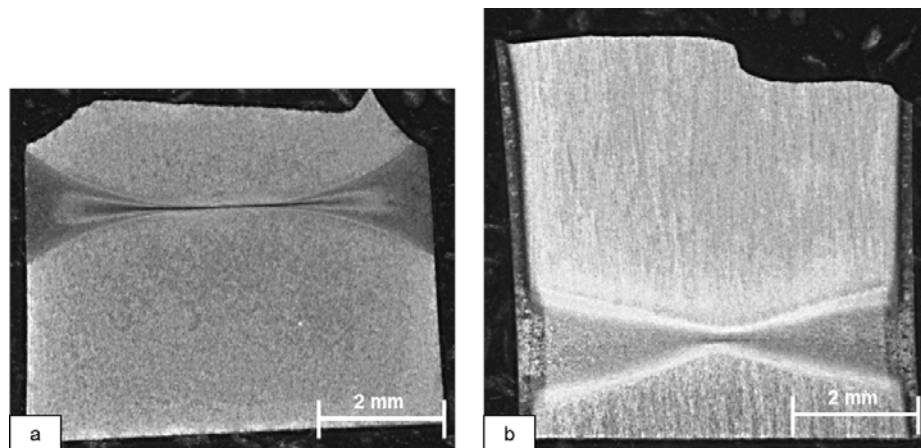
Example of the failure position after cross section the half fractured fatigue specimen a) RFW fatigue specimens and b) friction welded LST processed fatigue specimens.
